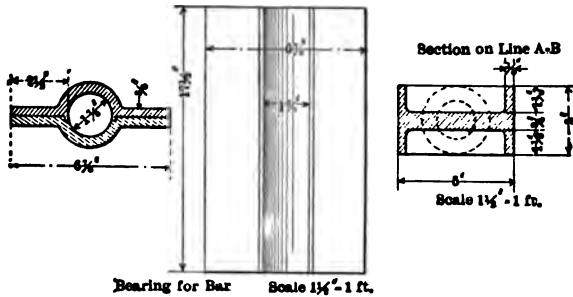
DETAILS OF BARS AND BEARINGS, HOFMANN DUST COLLECTOR.
